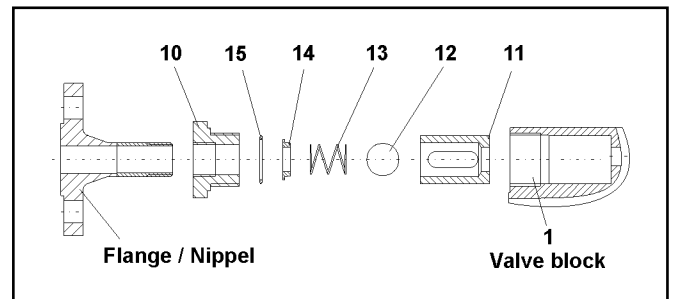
NR-valve => Parts list, see Table 1 on page 2
